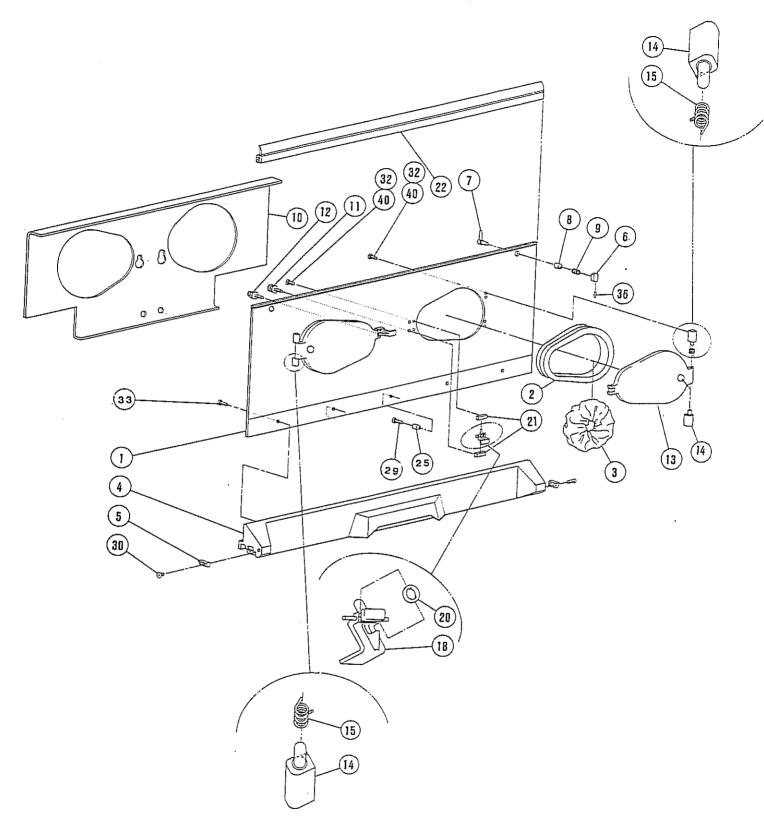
PARTS LOCATION DIAGRAM, ACCESS PANEL ASSEMBLY, GROUP 1
